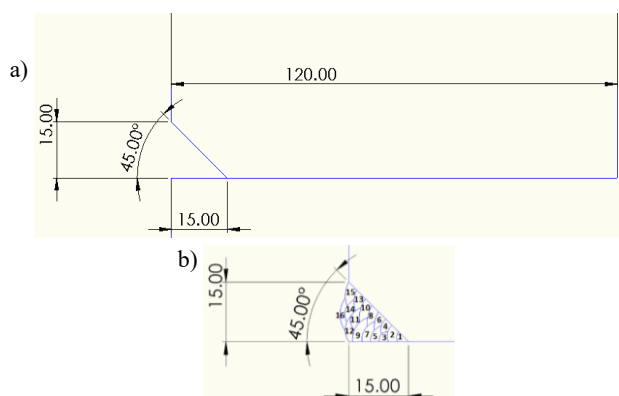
a) Welding groove; and b) sequence of passes.
